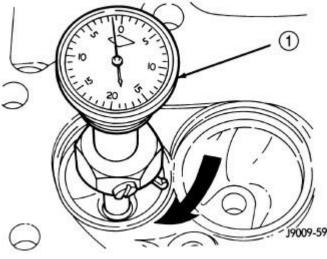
Measurement of Valve Seat Runout Courtesy of CHRYSLER LLC
